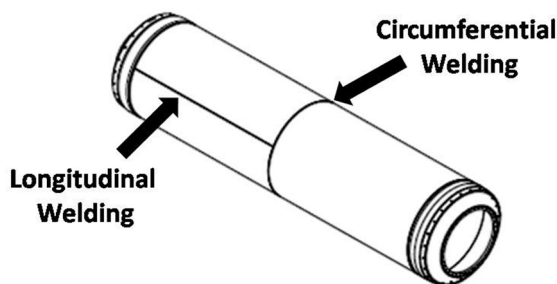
Schematic representation of a rocket motor case with longitudinal and circumferential weld.
